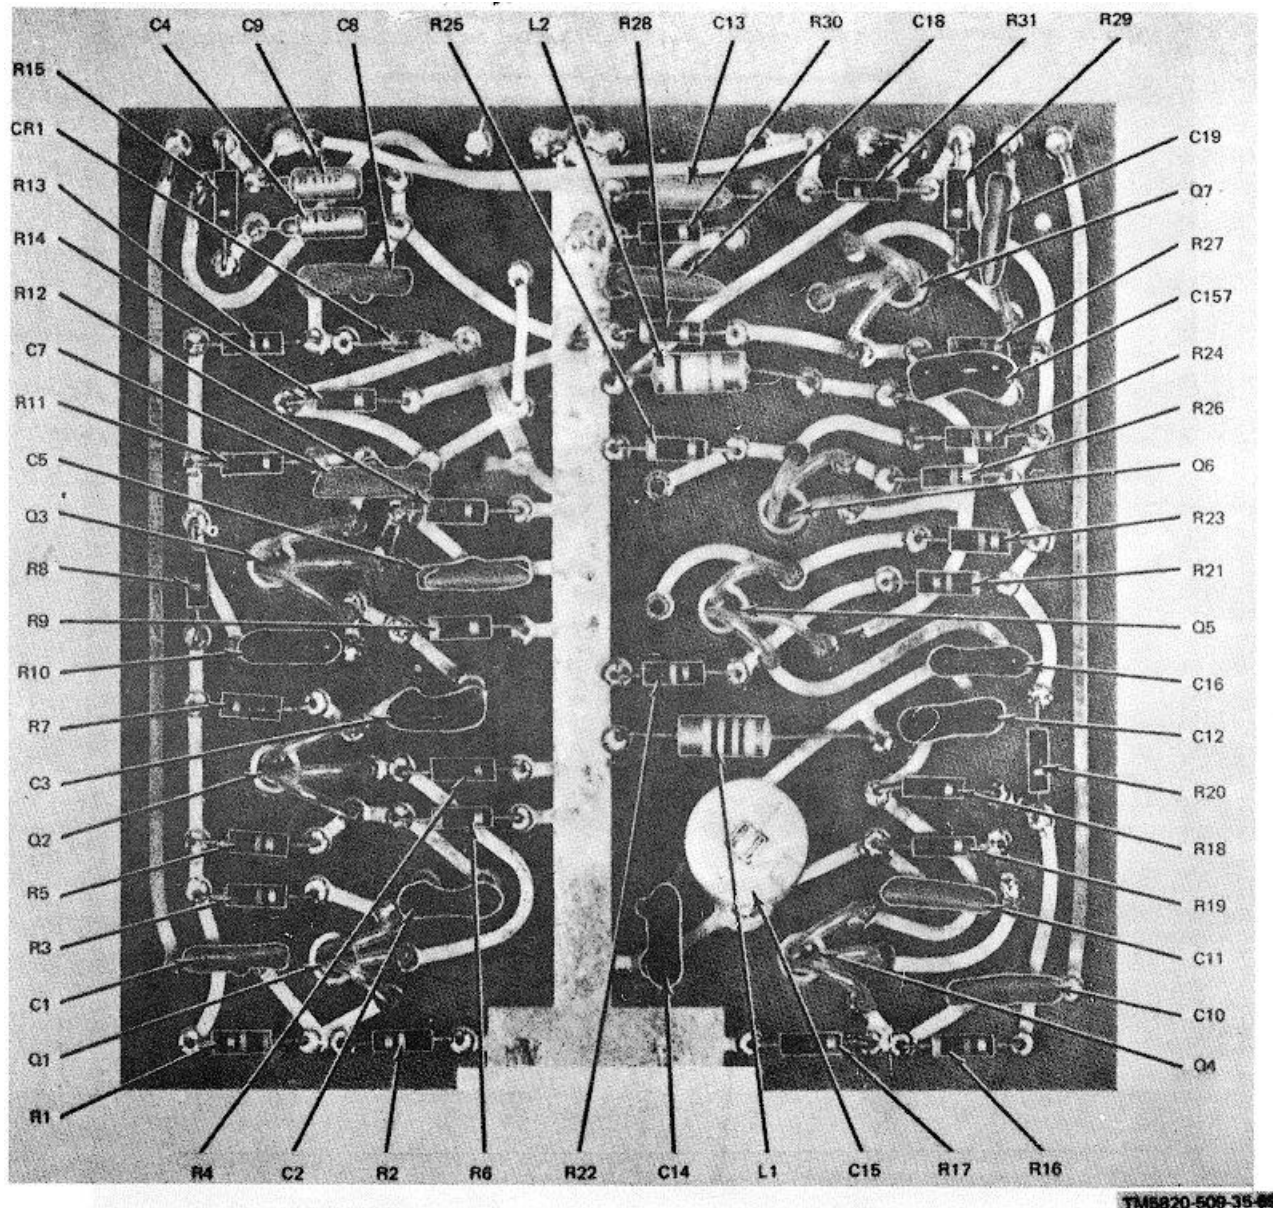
Oscillator Control C-4311/PRC-47 (A8A7), Card Assembly E1.
